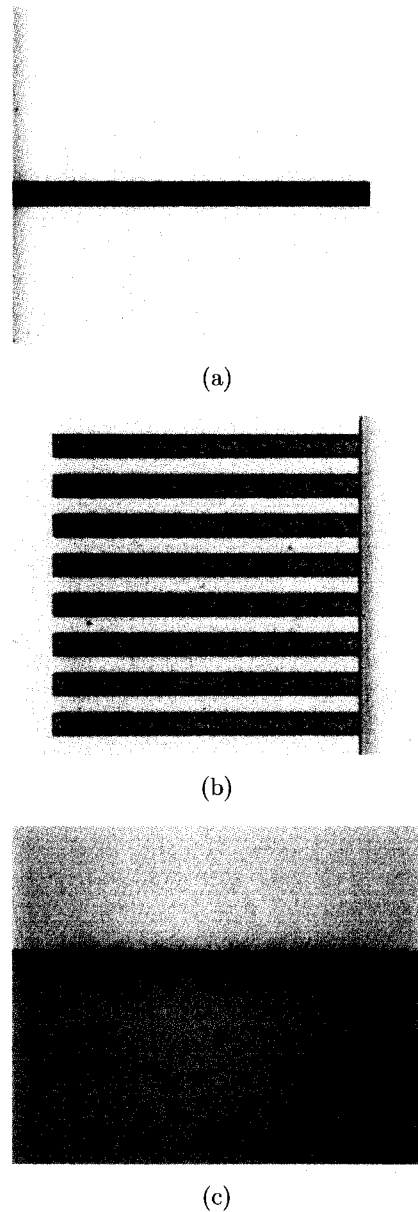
U-groove on the PLC chip based in the Si substrate, machined by femtosecond laser pulses; (a) top view of input channel, (b) top view of output channel, and (c) side view of output channel at the surface of U-groove. The size of U-grooves is $126 \mu\text{m} \times 87 \mu\text{m} \times 2 \text{mm}$.
